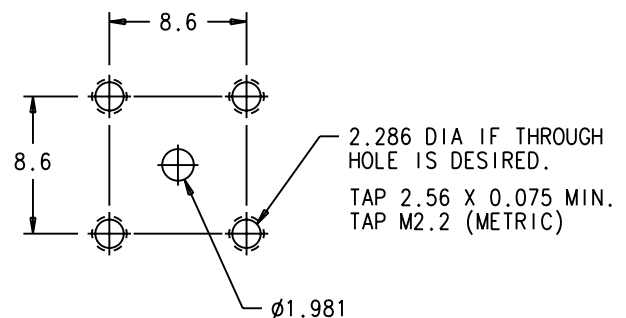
K104 Flange Mount Mounting-Hole Dimensions (mm)
